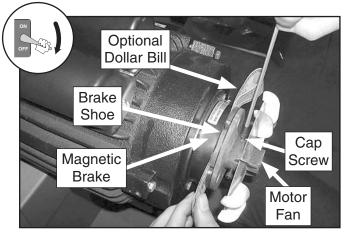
Adjusting distance between magnetic brake and brake shoe.
